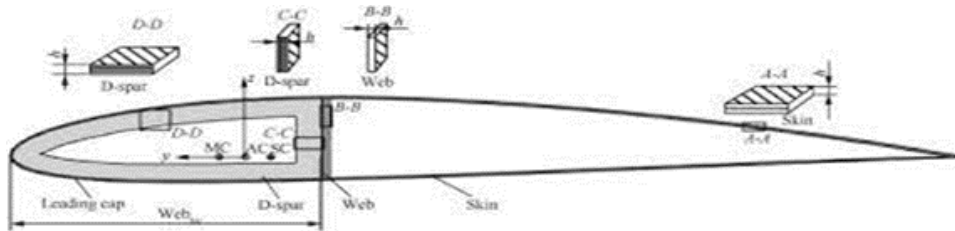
Airfoil shaped rotor blades ($C_d = .045$)
